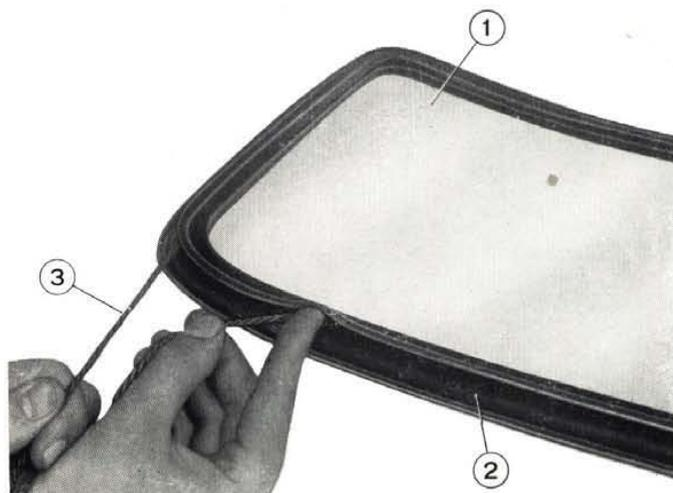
Arranging draw cord, preparatory to windshield glass installation.
